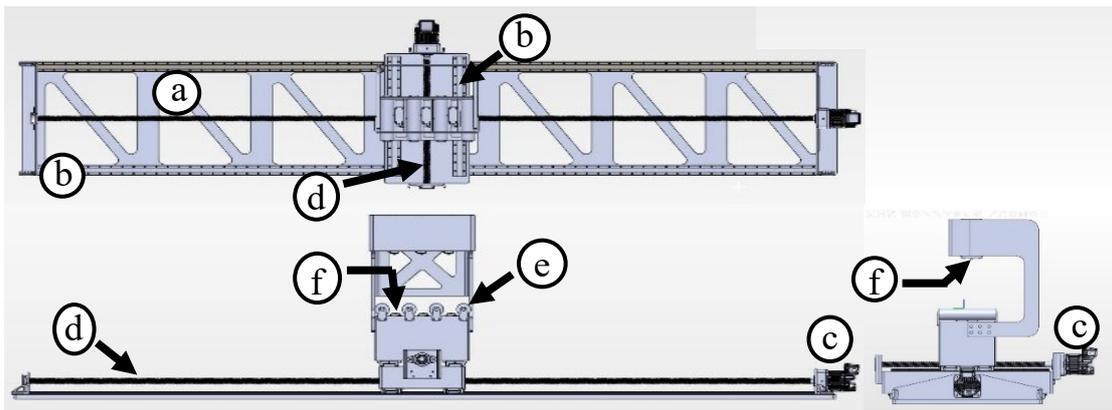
Flexible clamping station: (a) Steel plate; (b) Wide ball bearing carriage and rail; (c) Servomotor CPM-MCVC-D1003P-RLN; (d) Worm gear; (e) Industrial polymer rolls; (f) Pneumatic cylinder SMC HYG50TFR-200.
